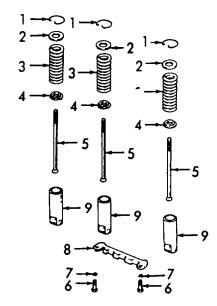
Cam Followers, Push Rods, and Springs, Removal/Installation.
